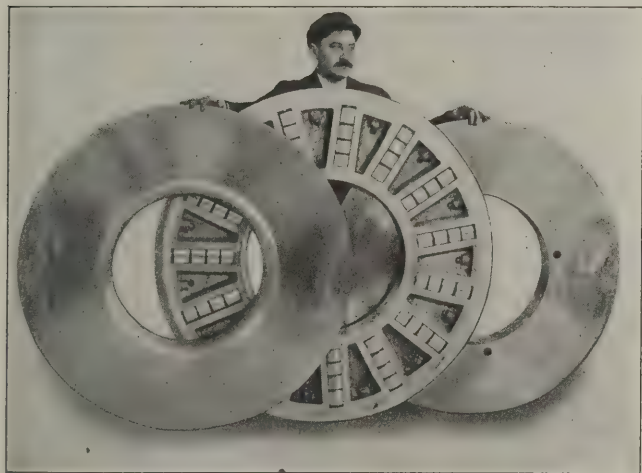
Example of Unusually Large Roller Thrust Bearing
